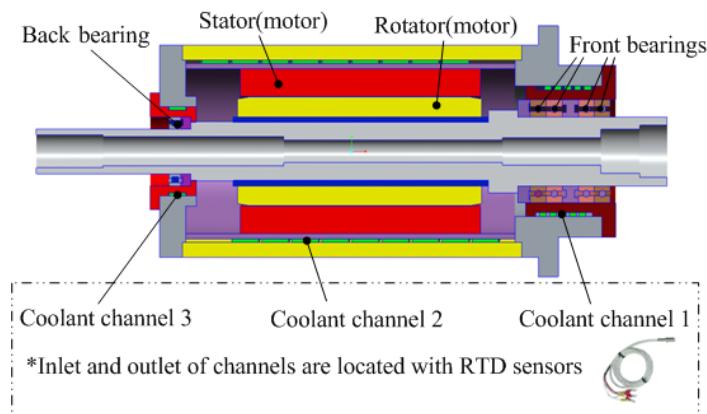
Heat generating parts and coolant channels inside built-in motorized spindle
